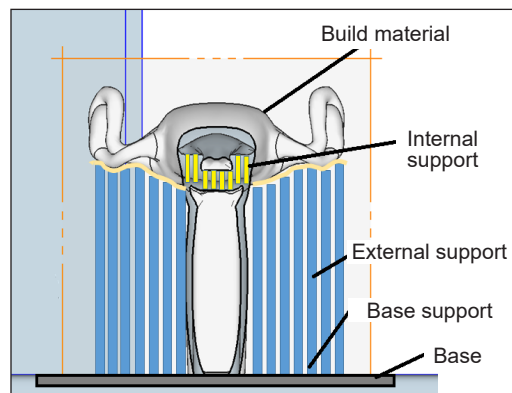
The hollow part cross-sectional view shows external and internal support structures with a printing base
